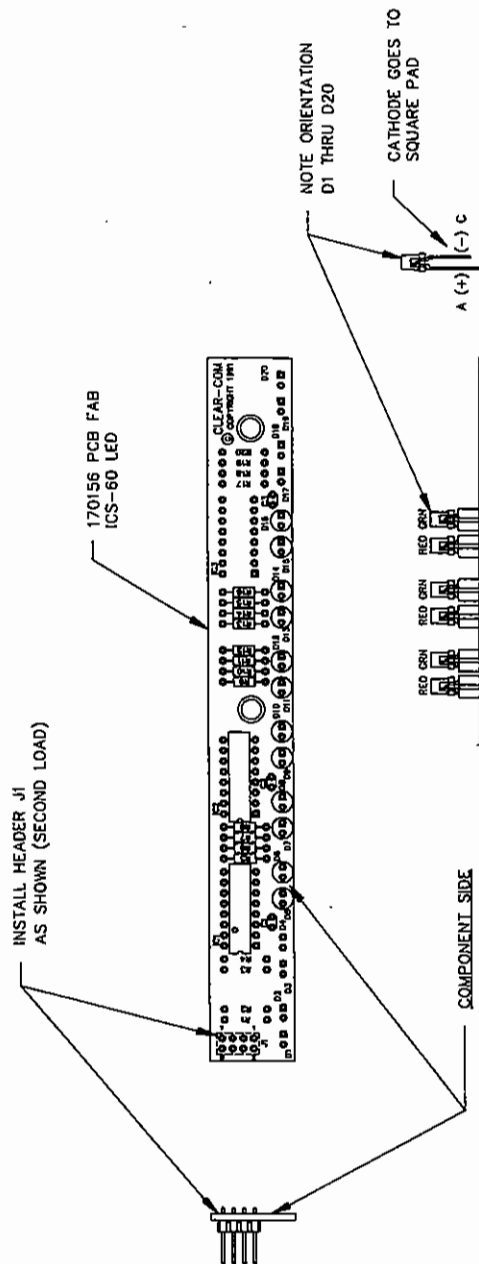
Assembly Drawing - ICS-62 Selector Switch LED PCB Rev. A
